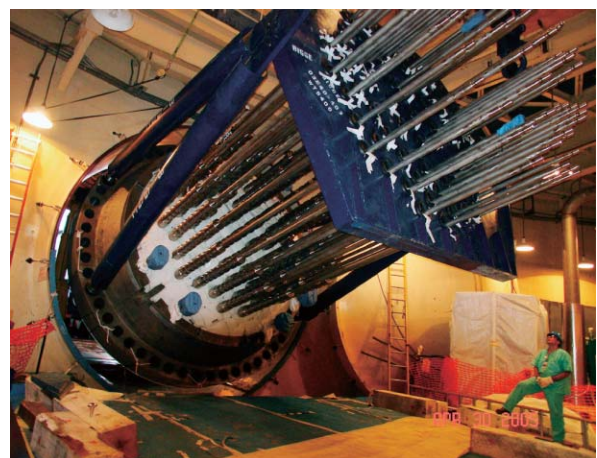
Assembly delivery of reactor vessel closure heads and CRDM
